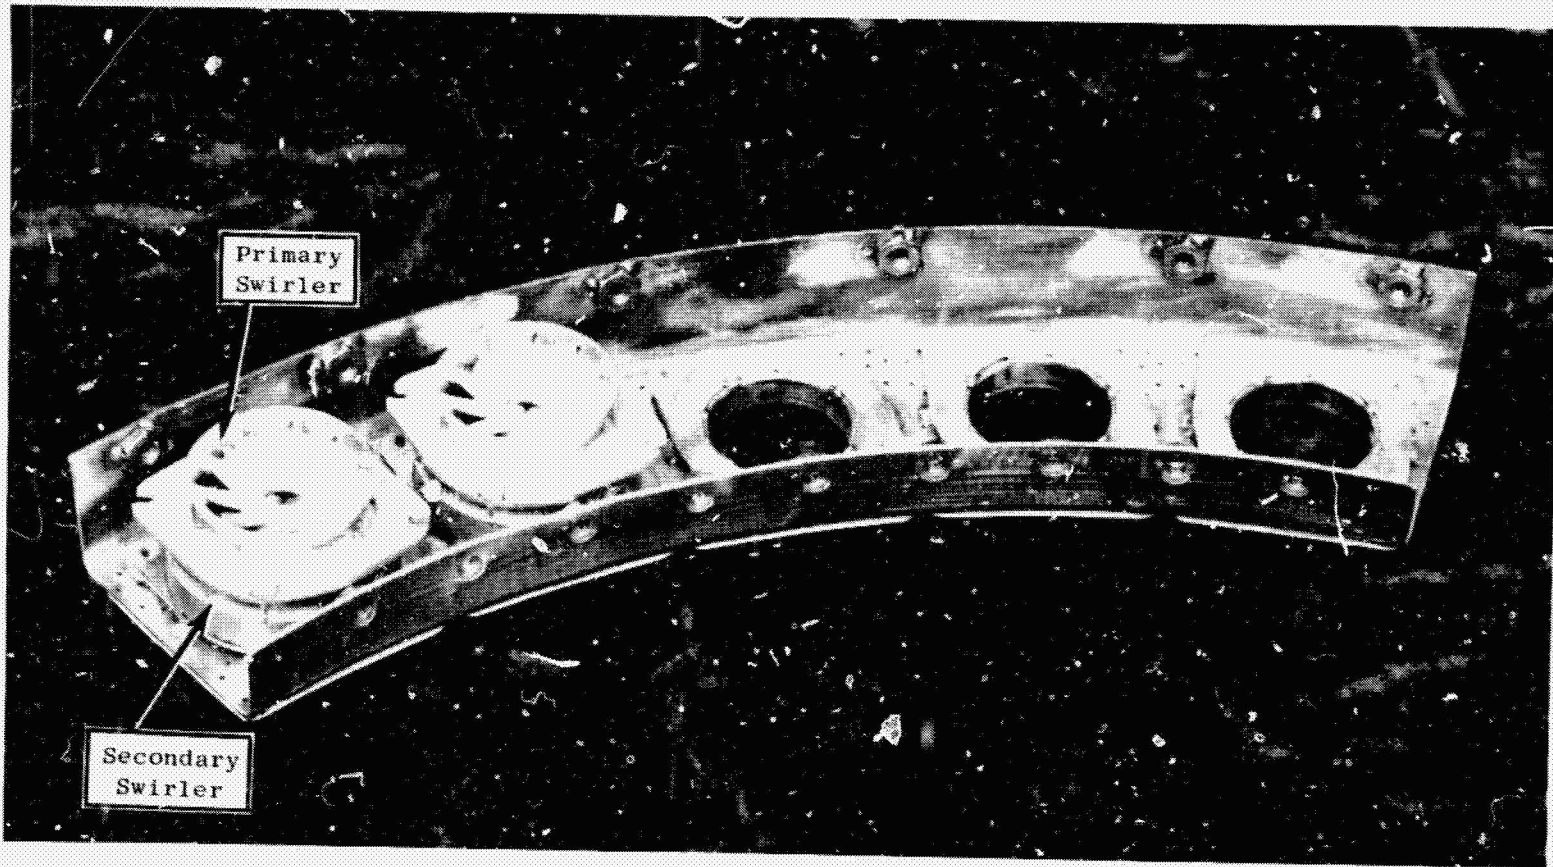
Parallel-Staged Sector Combustor Partial Assembly Showing Swirler Inlets.
